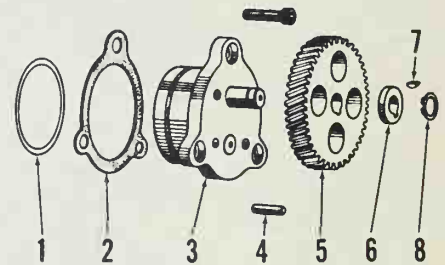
View of oil pump. Dowel pins (4) are inserted through pump end plates and body.
